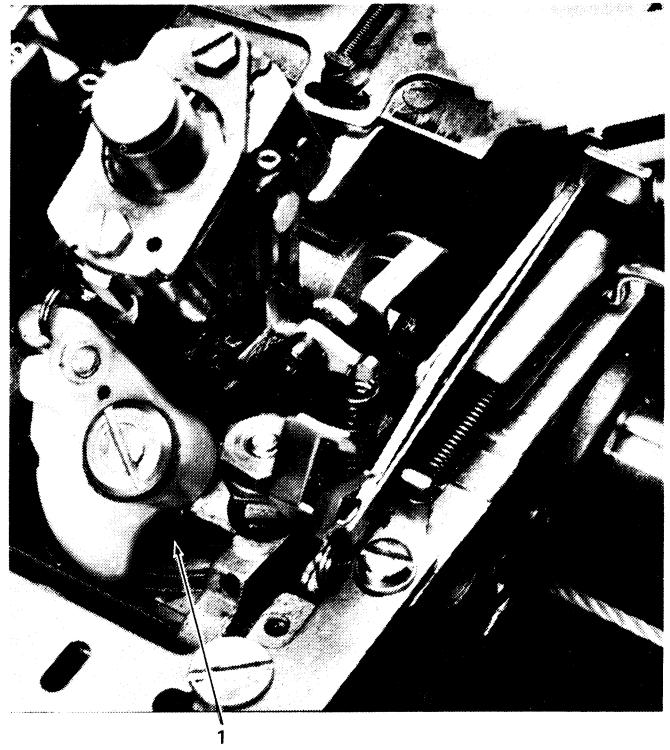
Rotate Tape Replacement (Rear of Carrier)
